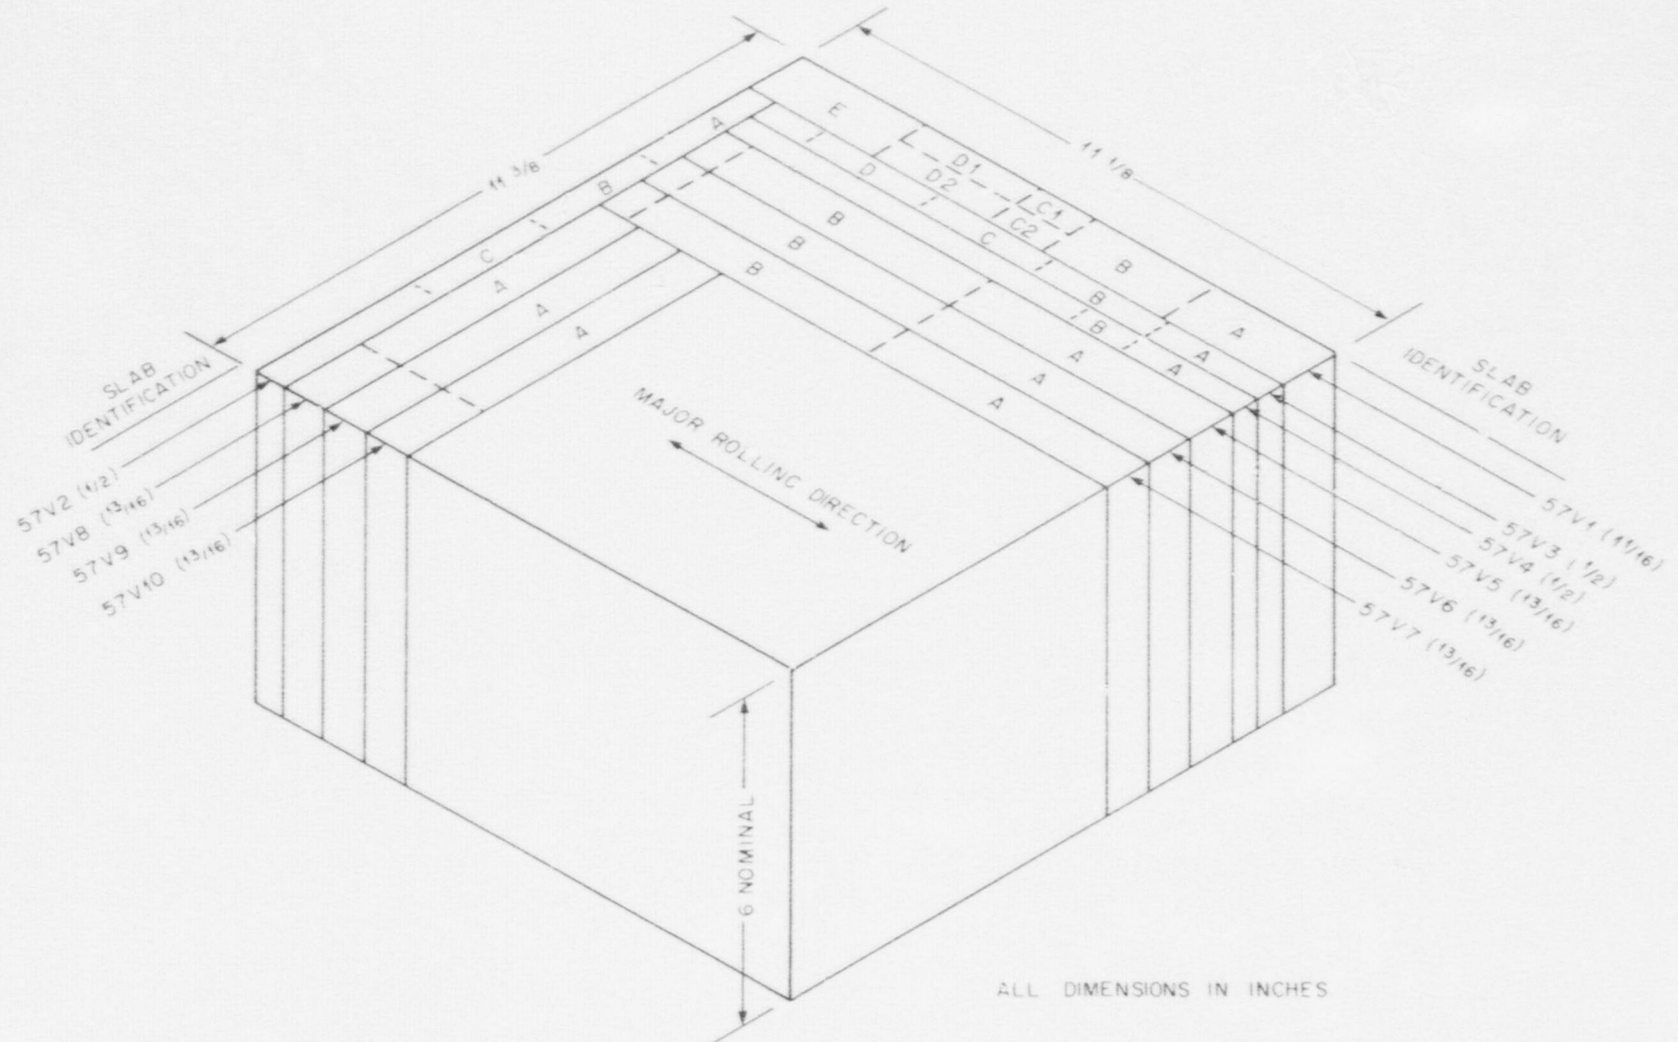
Cutting plan for base material from HSST submerged-arc weldment W57 (1 in. = 25.4 mm).
